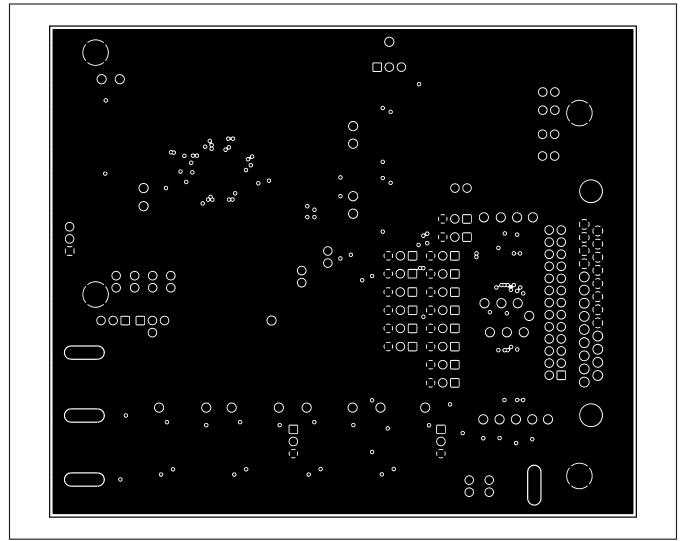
MAX2839 EV Kit PCB Layout—Inner Layer 2, Ground Layer
